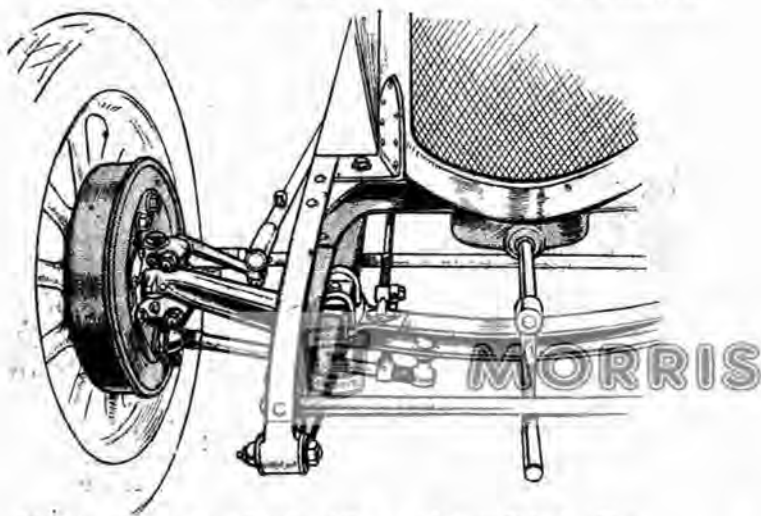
Front axle and brake of the 1925 Morris-Oxford. The wing nut adjustment is situated close to the spring pad. The axle is specially designed to take the braking stress.
